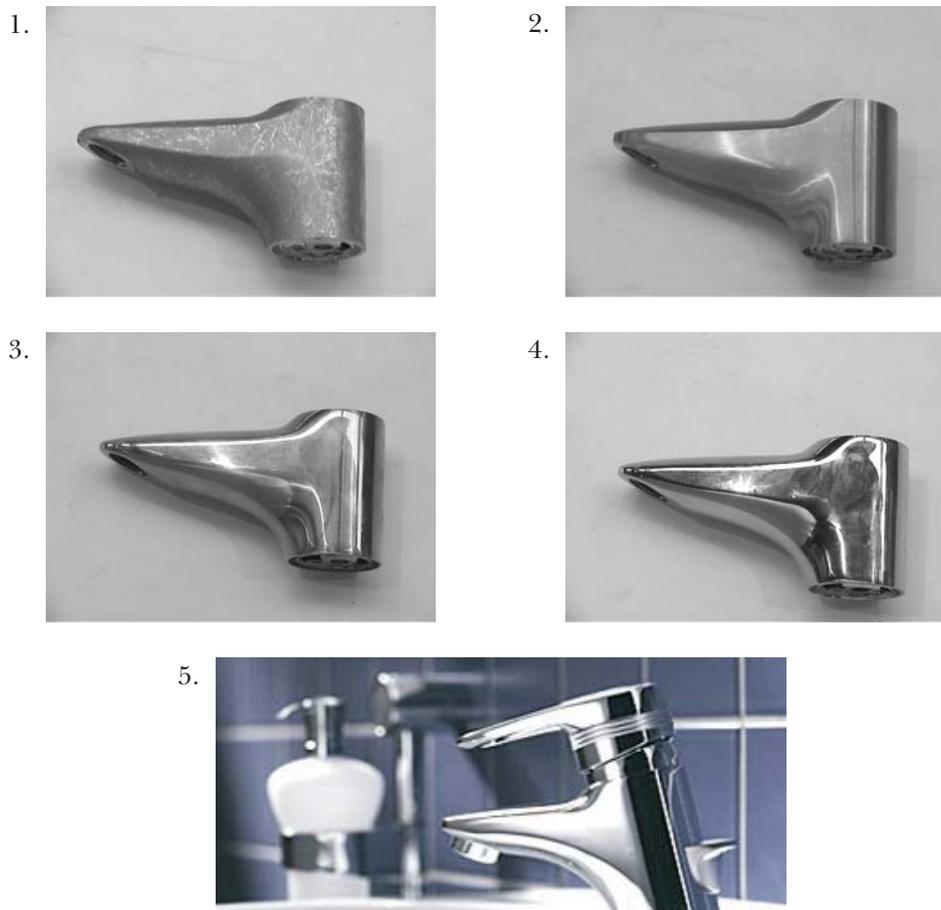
Manufacturing steps in the manufacture of fittings – 1. casting, 2. grinding, 3. polishing, 4. galvanizing and 5. the end product
